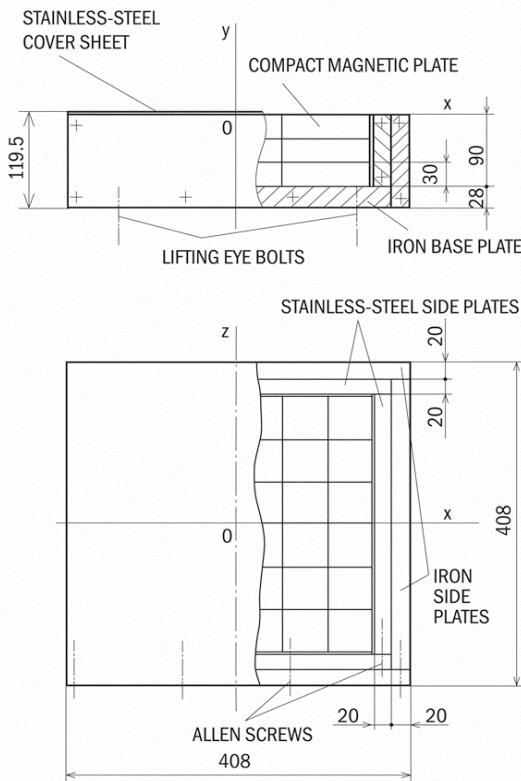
Dimensional scheme of the trial magnetic circuit (Assembly 3).
